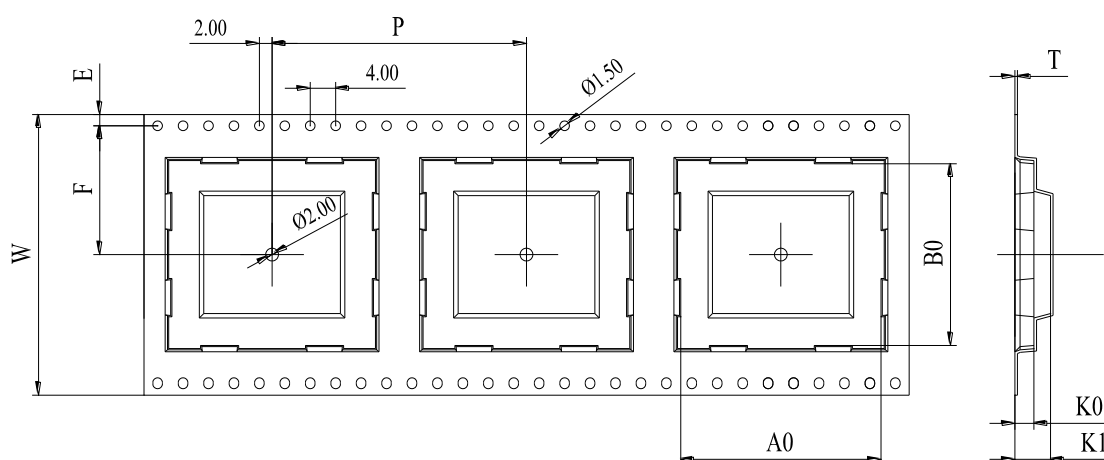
Carrier Tape Dimension Drawing (Unit: mm)
